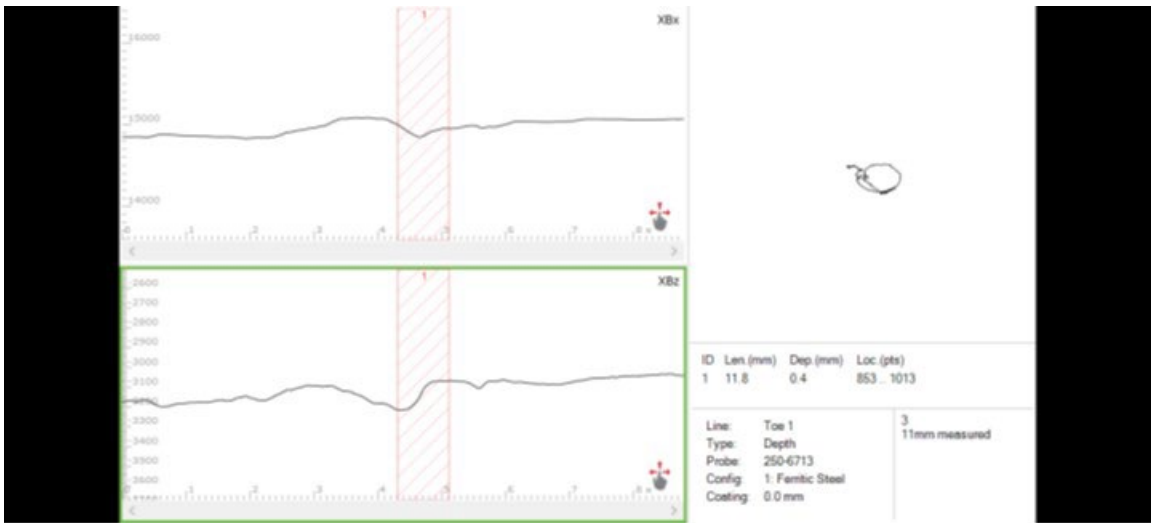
ACFM scan data of Flaw 1 for butt weld MG-6 panel
